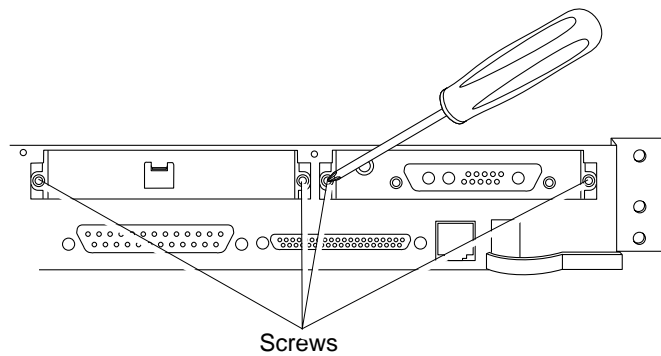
Attach the ZX Board to the System Board Back Panel
